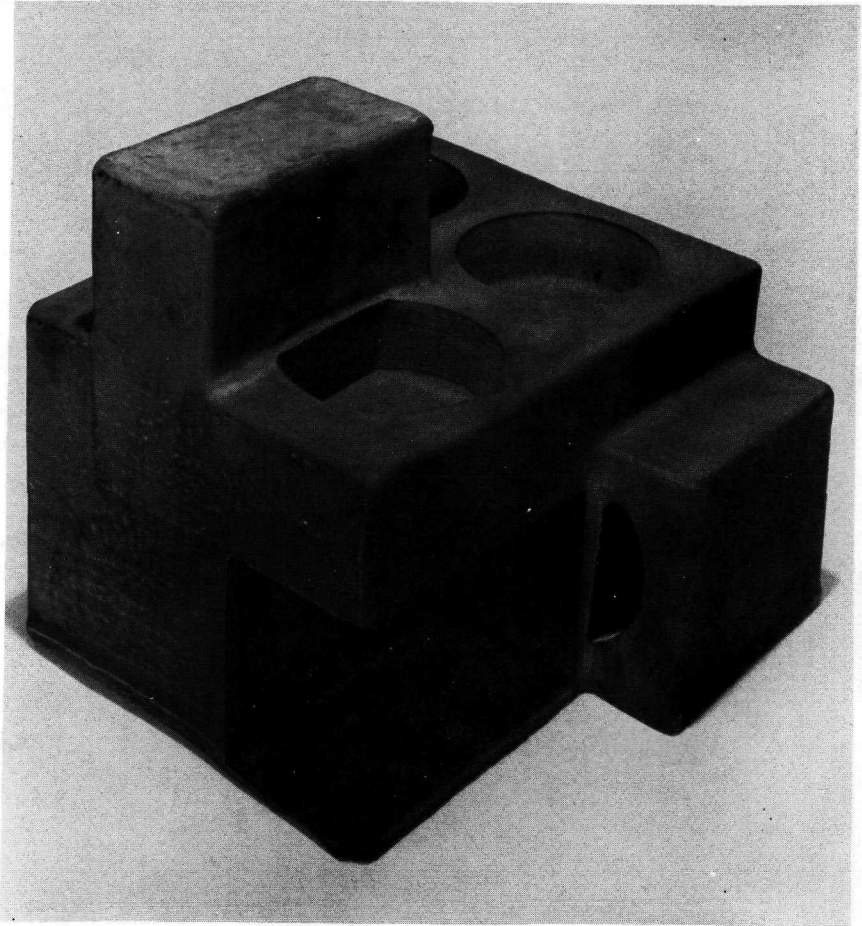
Compacted beryllium block with inserts removed (ref. 18).
